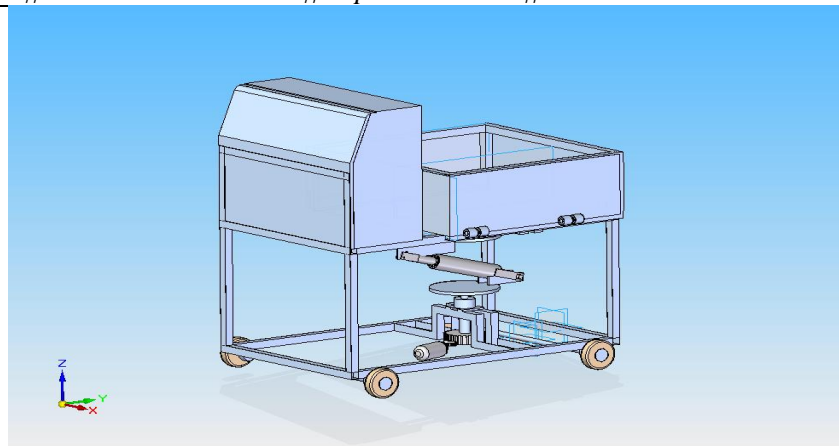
Full Assembly (ISOMETRIC VIEW)
